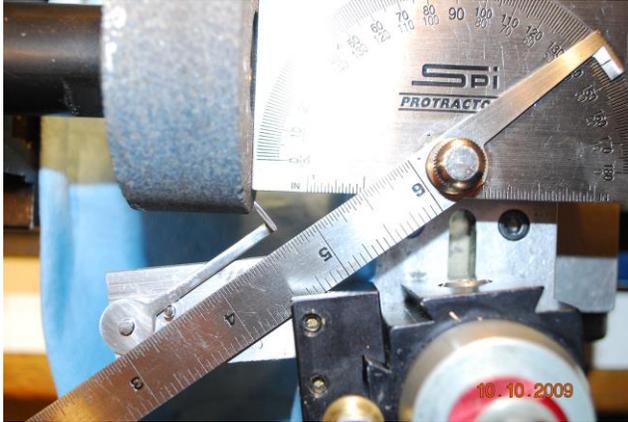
Use a protractor to set the jig to the correct angle for grinding the impulse face. Since the side of the protractor is being used, the angle is set to 144° ($90^\circ + 54^\circ$). The jig consists of a piece of aluminum with two pins. One pin fits through the pallet arm center hole and acts as a pivot. The other pin stops the arm from rotating clockwise.
